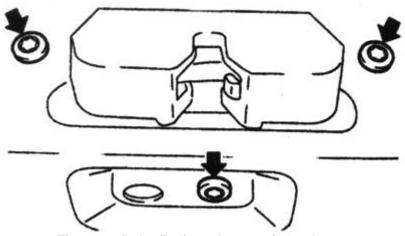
Bolts (indicated arrows) attachment castle Doors back of
